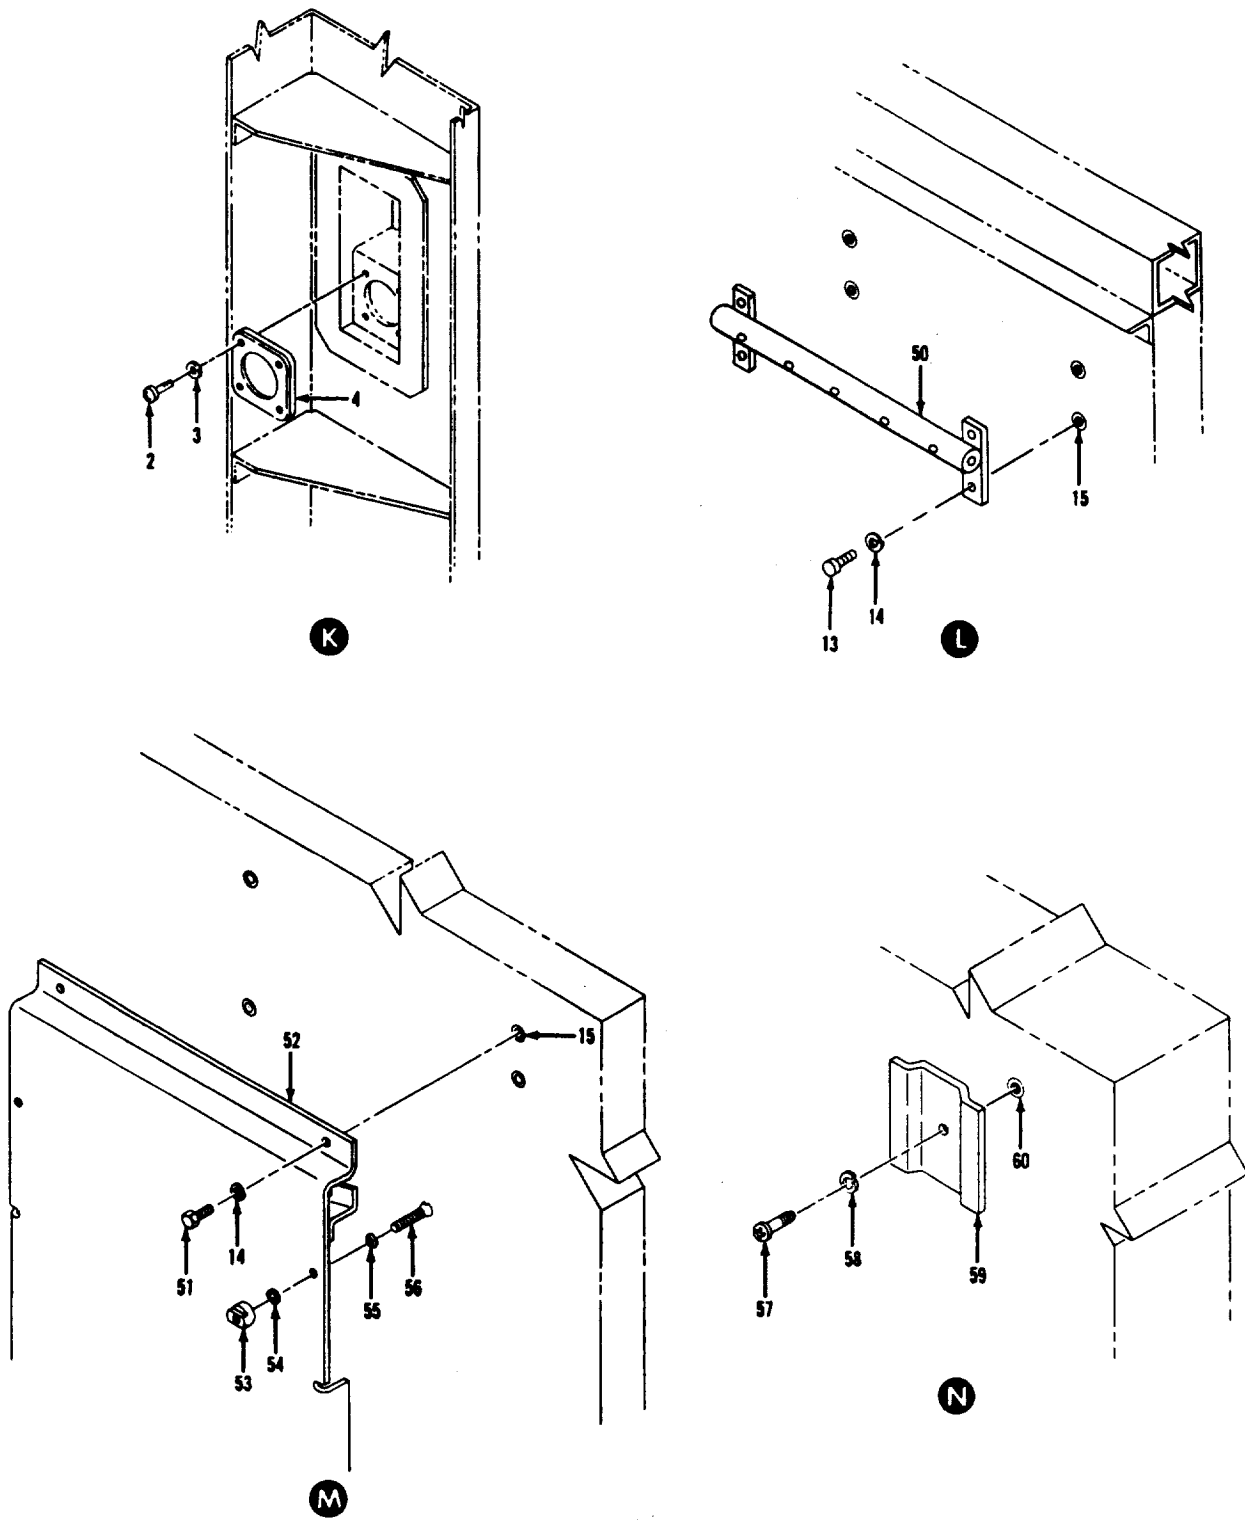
Equipment Installation (Sheet 5 of 25)
